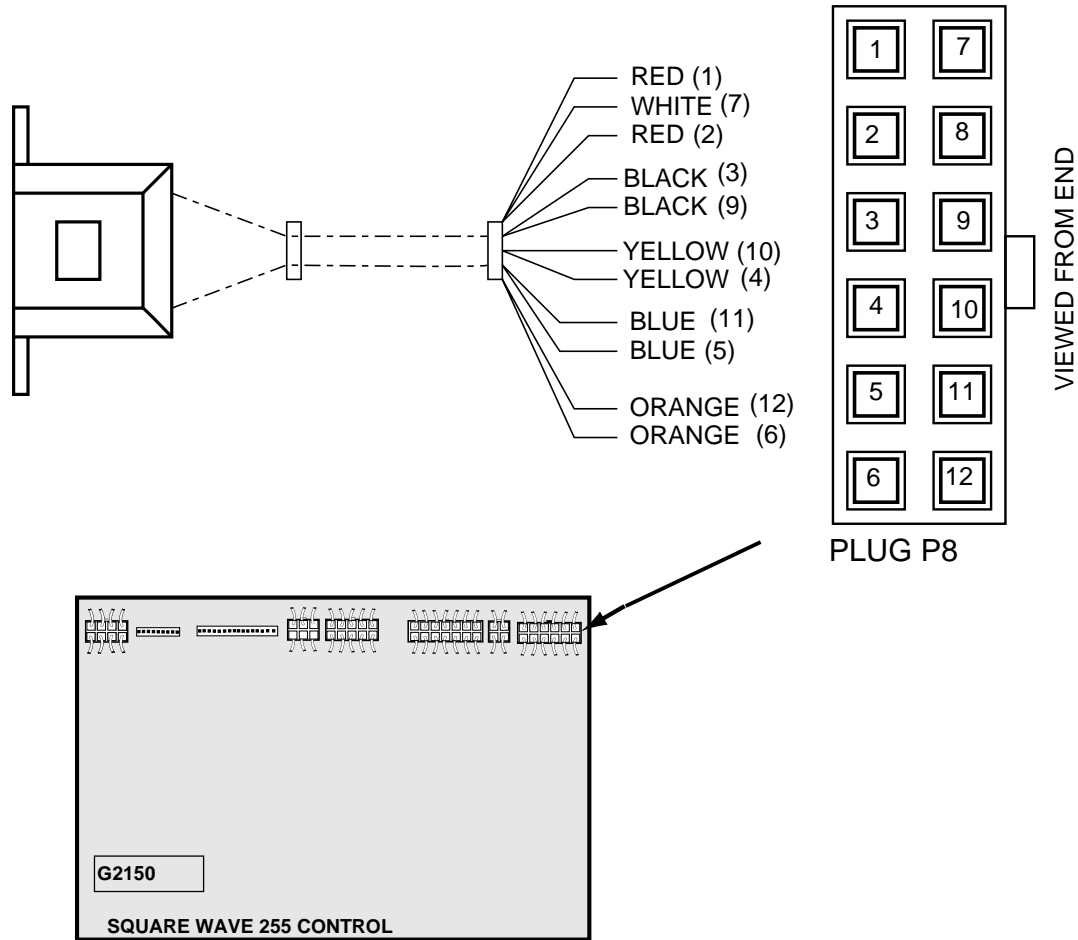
CONTROL BOARD AND TRANSFORMER.
